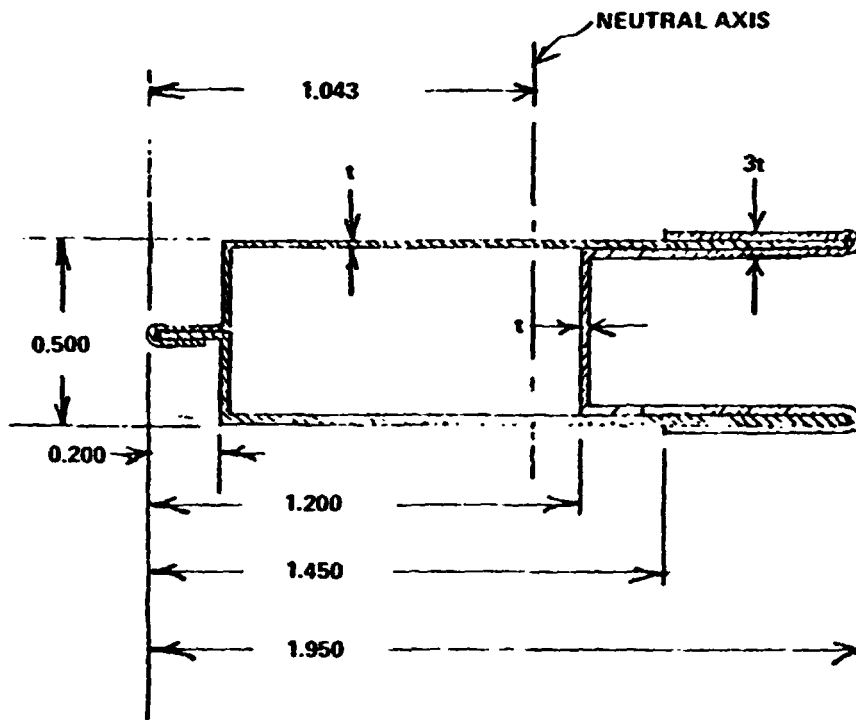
Figure E Proposed design of the shield for the foreplane assembly. Design consists of three parts. The parts are continuously assembled to each other by rolling over flanges left on top and side pieces, after the parts flow around the enclose the core of the foreplane.
